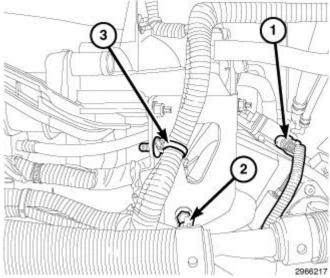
Heater Core Supply Tube Support Bracket & Retaining Bolt Courtesy of CHRYSLER GROUP, LLC
